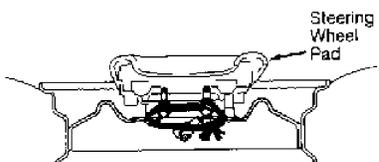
Installing Steering Wheel Pad Onto Wheel Assembly
